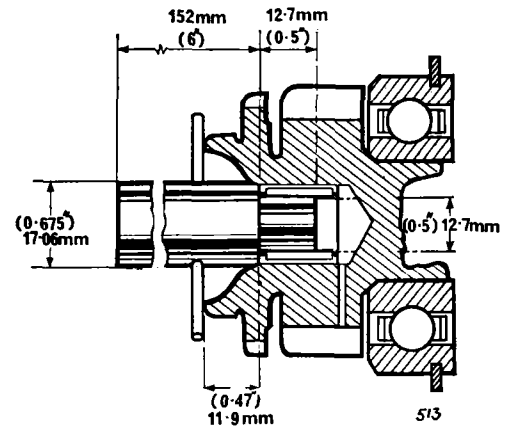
Details of drift used for driving the needle bearing into the pinion
